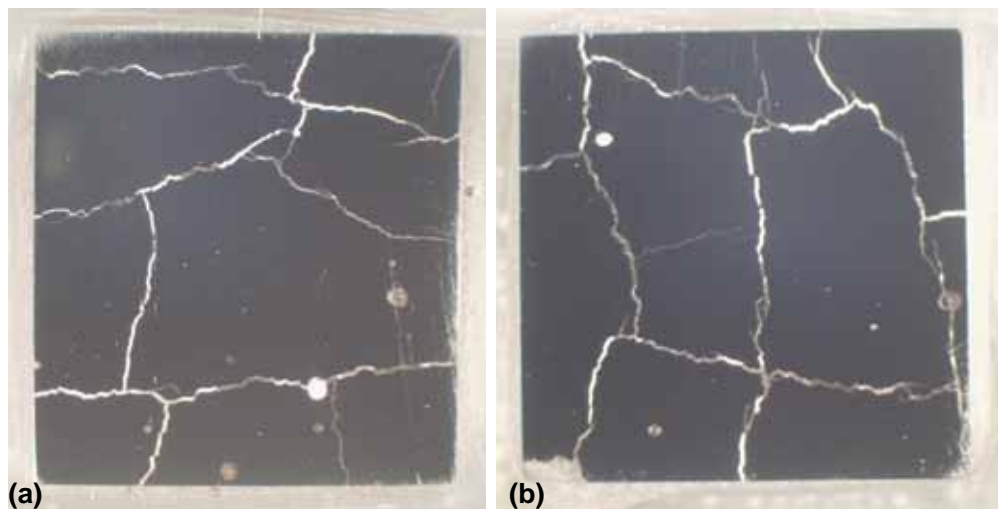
Photographs of two WeldoverlayB test samples used for corrosion testing. Note the differences in the check cracking. The dimensions of the samples are 15mm x 15mm.
